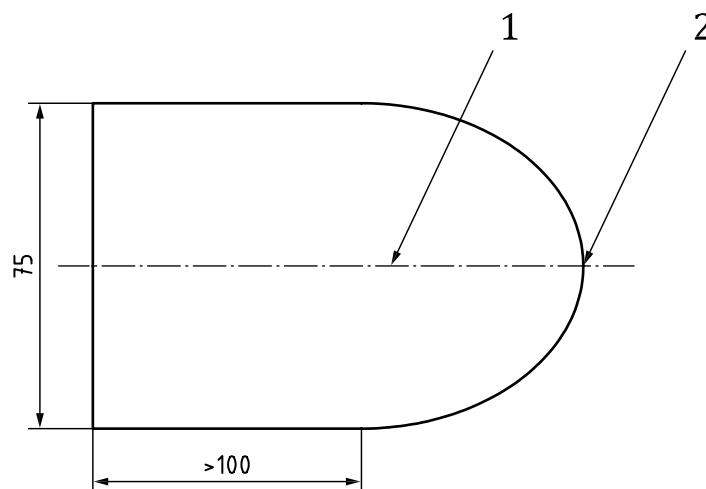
Schematic representation of the standardized tool for pointed attack
